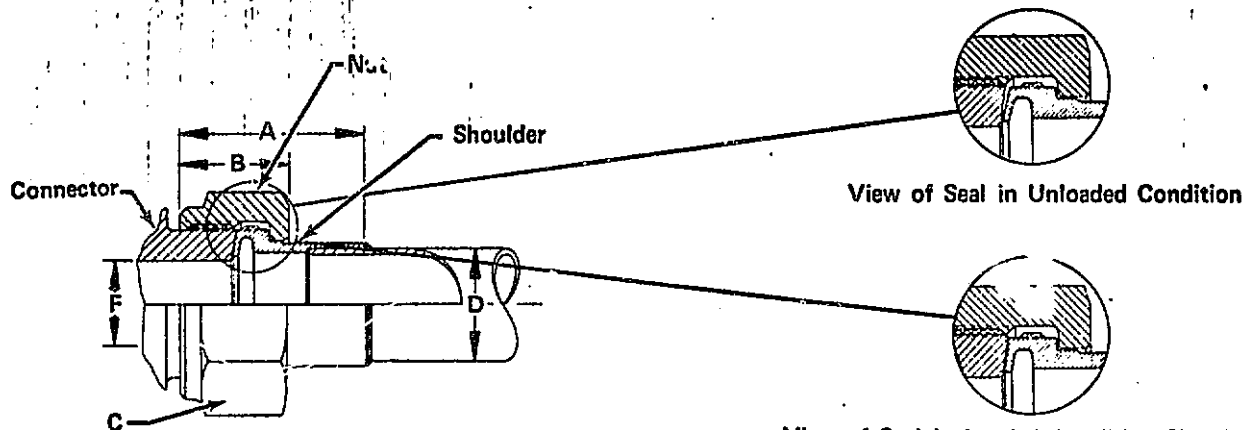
Toroidal Segment Detail Part, Fit and Installed Shape FD 46260
